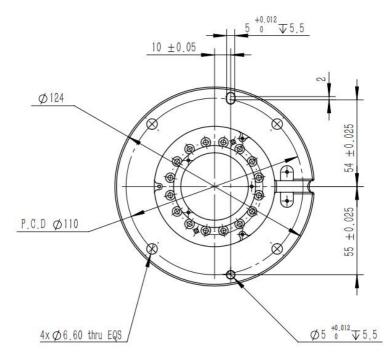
JAKA Mini Series Robot Base Installation Outline Dimensions
